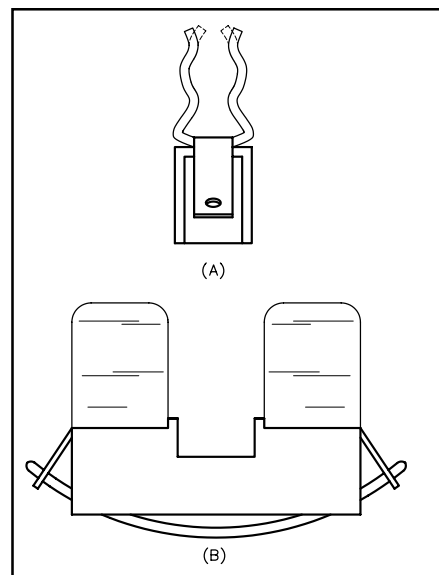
Making the tap connection to the coil. At A, the ends of the jaws of a 5-mm cartridge-fuse holder are bent inward (dotted lines) to grip the heavy wire of the coil. A side view of the fuse holder is shown at B. Bend the solder lugs at the ends of the fuse holder to accept a wire passing through them and beneath the fuse-holder base. When this wire is in place, bend the lugs farther up against the ends of the holder and solder them. Strip a $\frac{1}{4}$ inch of insulation from the tap wire and solder it to the wire joining the lugs beneath the fuse holder. Round off any sharp points or rough edges with a file, because you'll be gripping this connector tightly for attachment to and removal from the coil.
